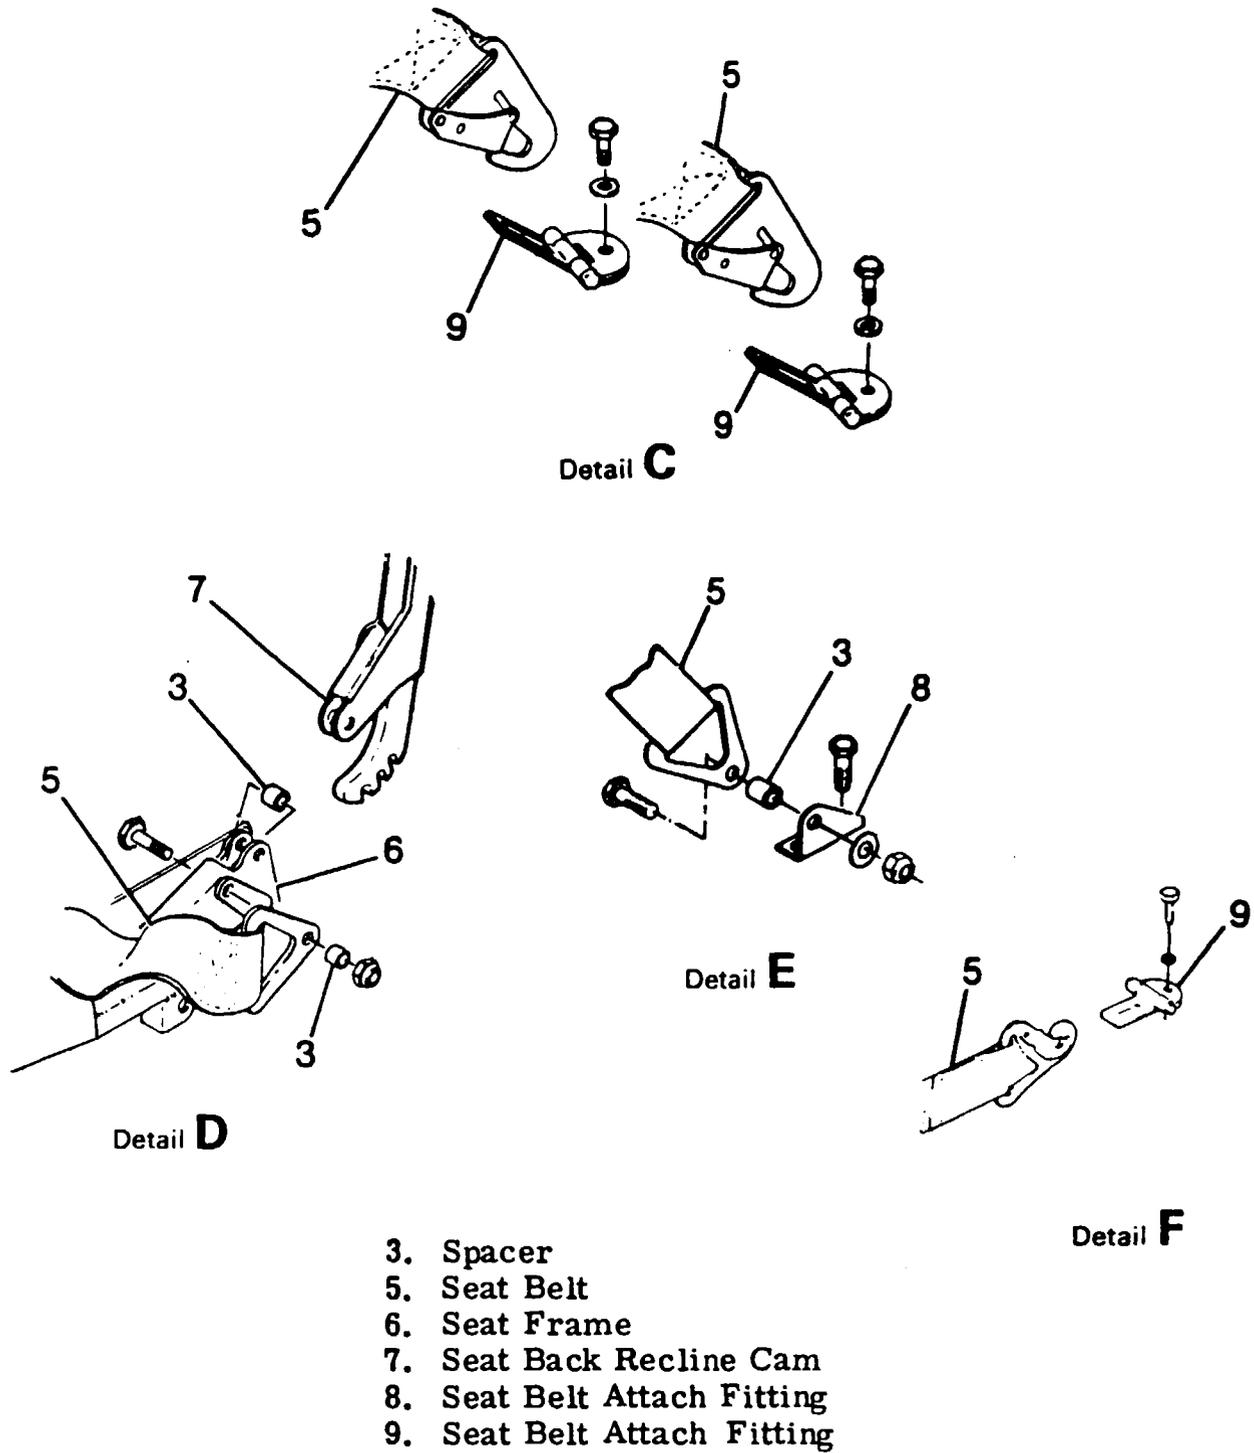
Seat Belts and Shoulder Harness Installation (Sheet 2 of 4)
